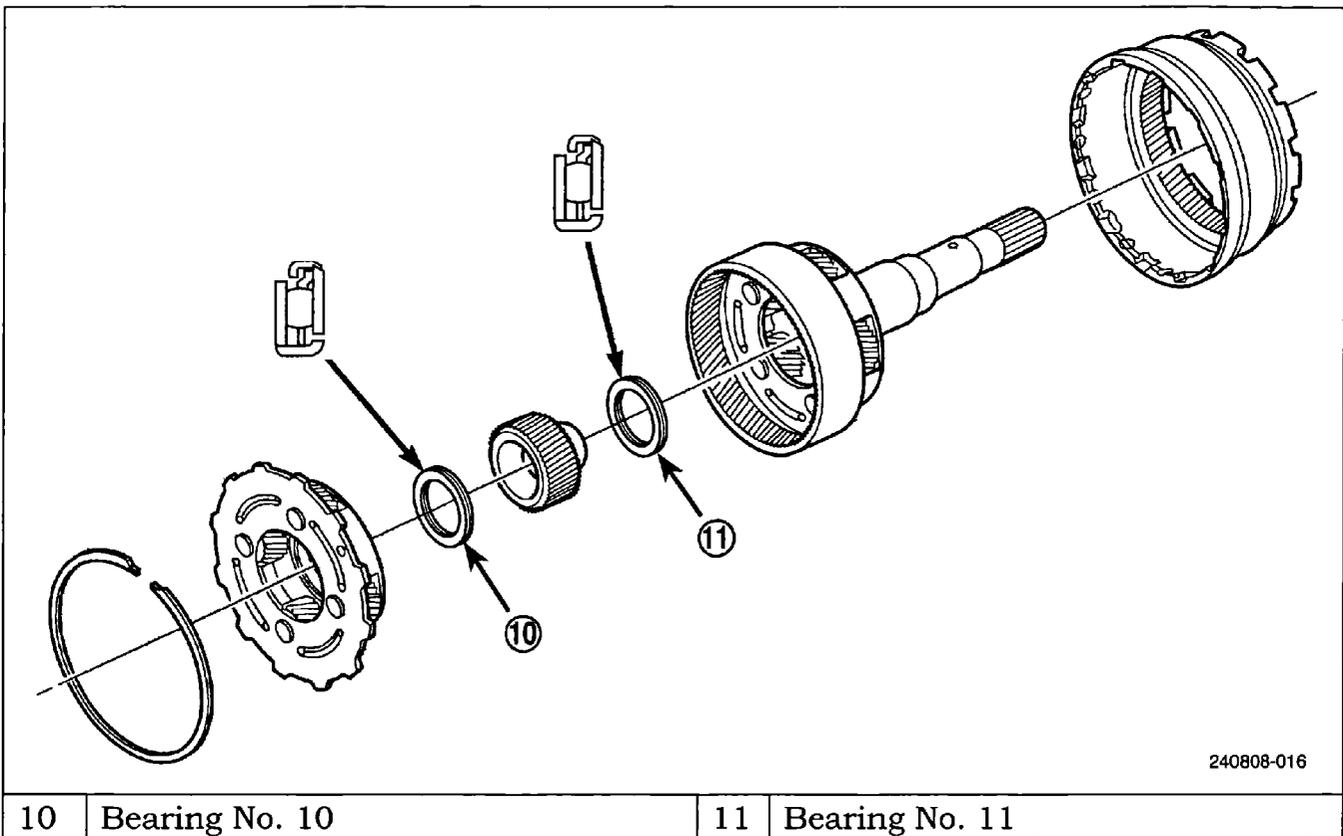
Input/Reverse Planetary Gear Train Roller Thrust Bearing Orientation
